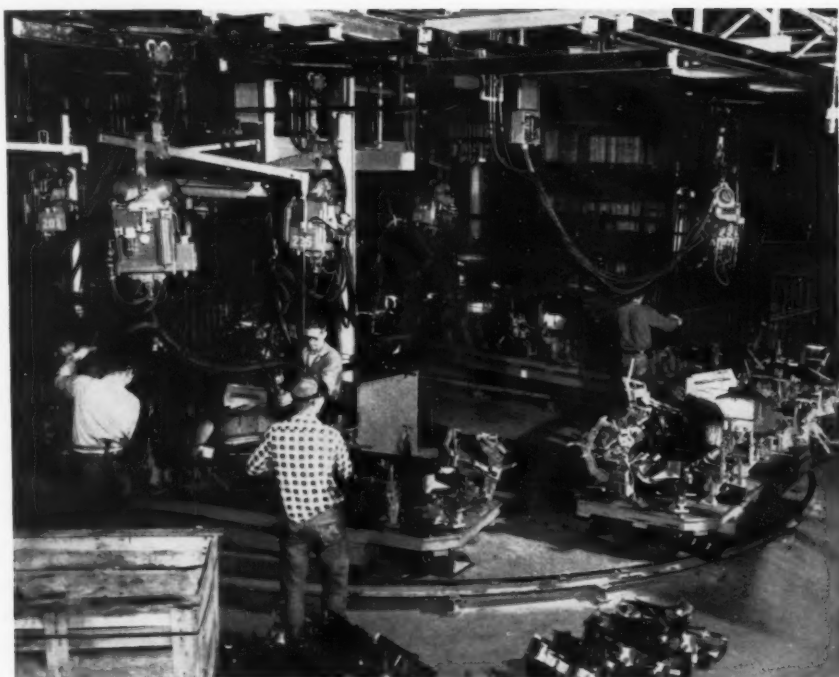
(Left) Merry-go-round conveyor equipped with fixtures for joining the underbody, floor pan, and front end with 1350 spot-welds.
